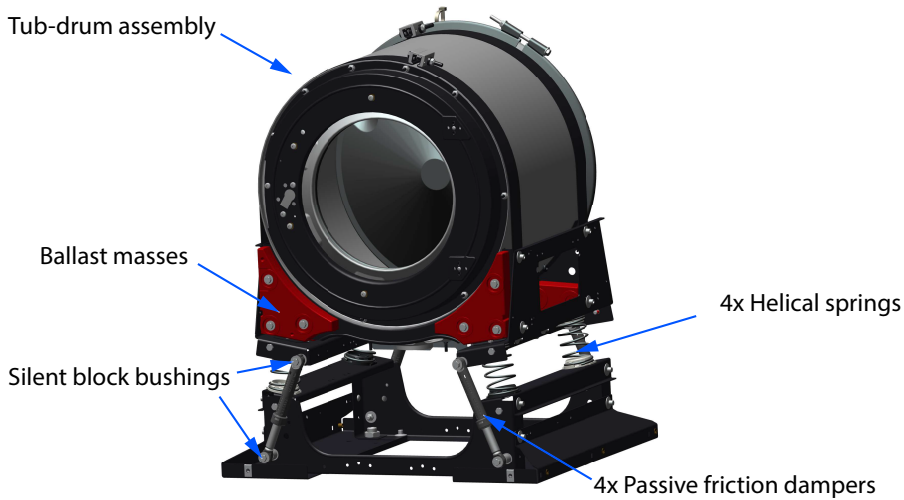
CAD view of the tub-drum assembly mounted on the suspension system composed by four passive dampers and four helical springs connected in parallel.
